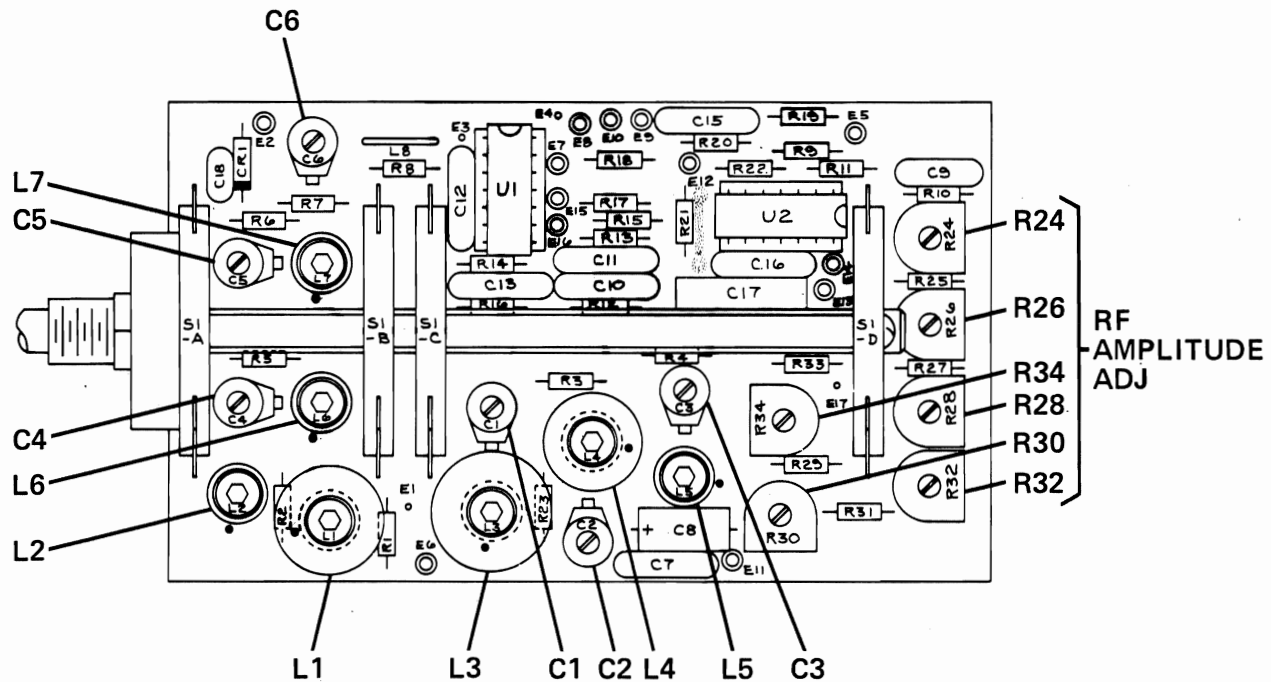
Printed Circuit Board A1A1, Components and Adjustments
